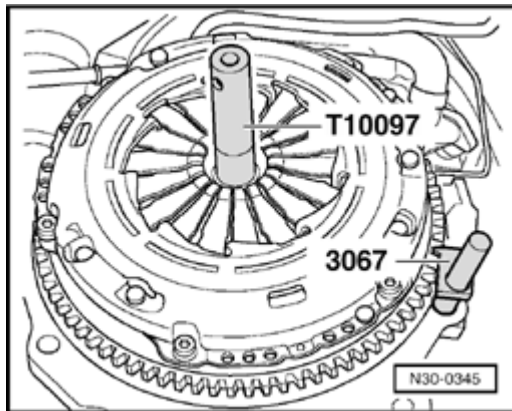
Centering clutch plate with larger hub diameter and removing and installing pressure plate
